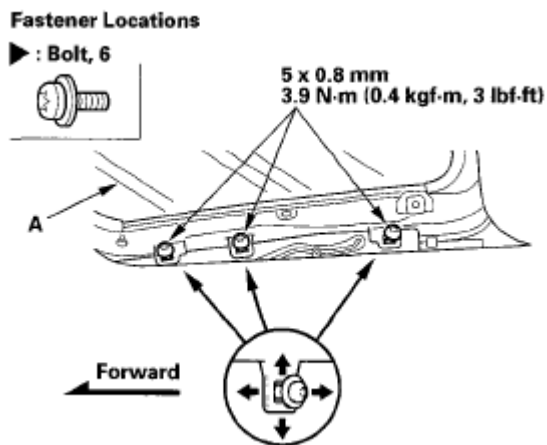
Identifying Bracket Cover Bolts With Torque Specifications
